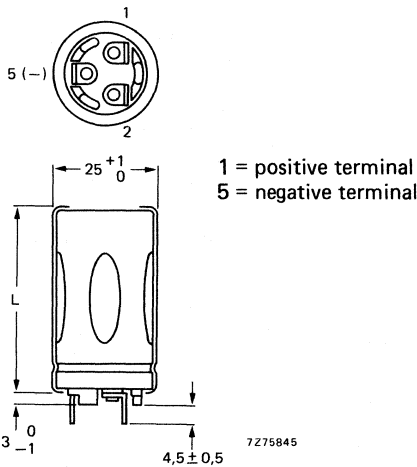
Capacitor with printed wiring pins; see Table 3 for dimension L.
